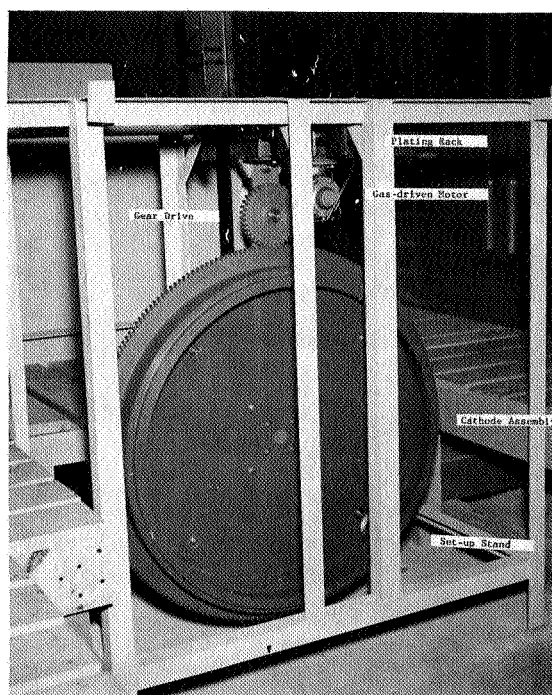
Close-up of mock-up stand. The rack which will hold the glass master is inside. Note the gas driven motor to drive gear which rotated mold holding rack member, as modified.
